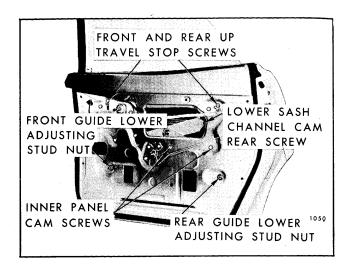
Rear Door Hardware - "Z-39" Styles
